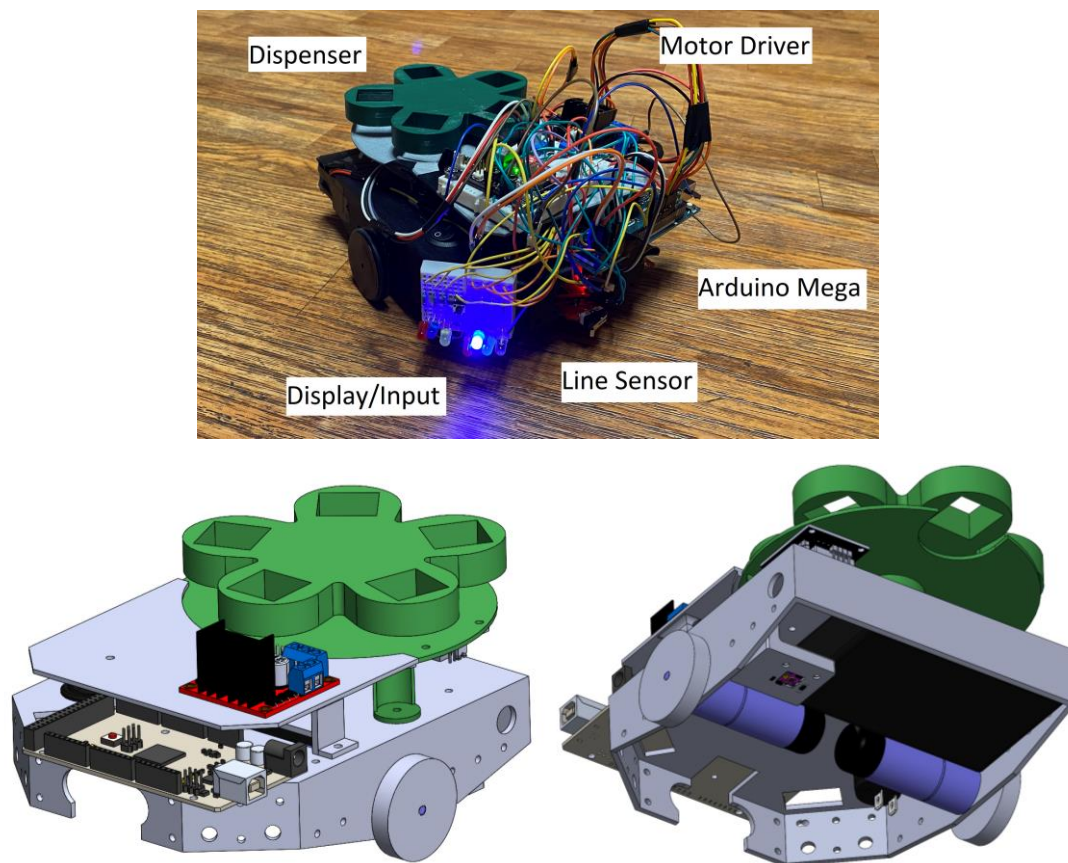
Final robot assembly (top) and final CAD assembly (bottom)
